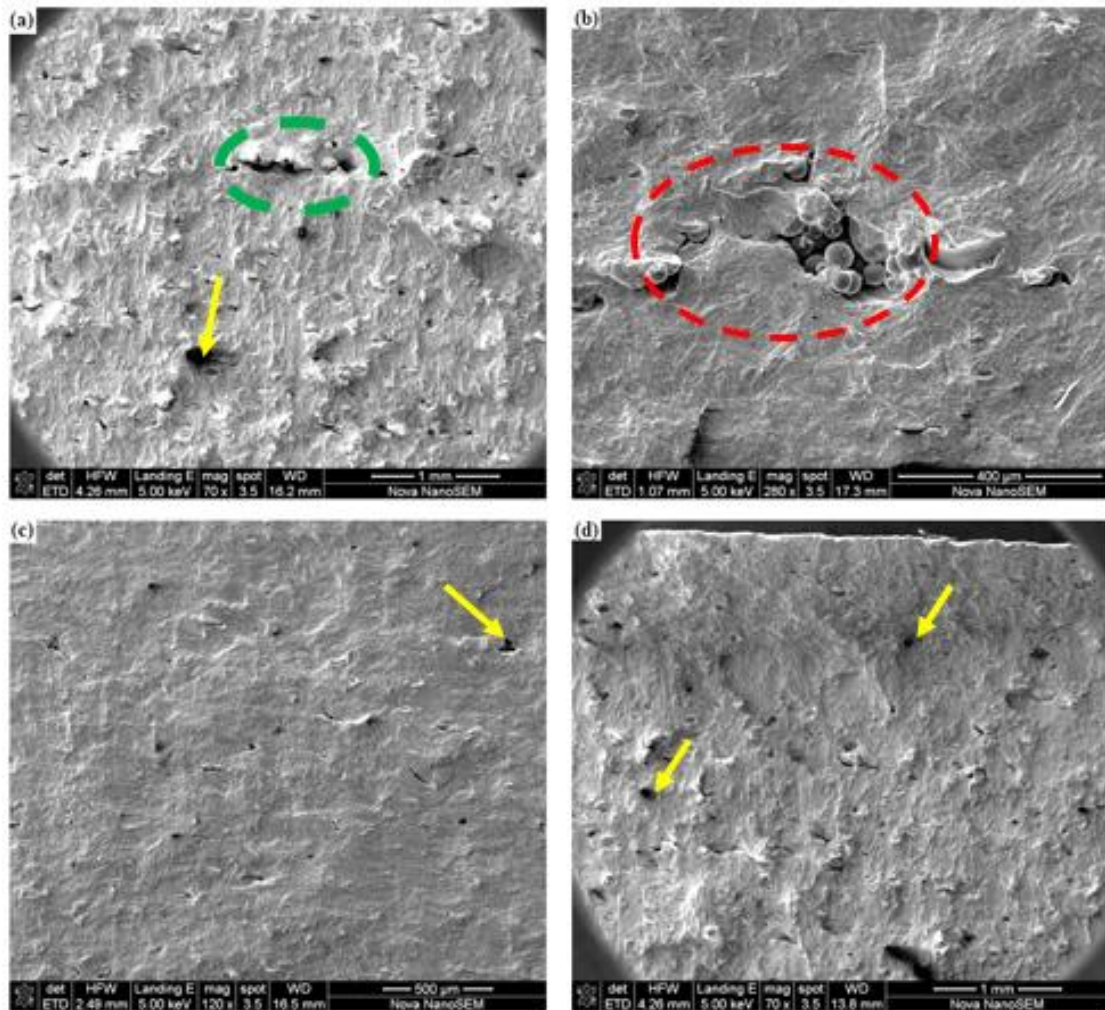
Fractographs taken on failed fracture toughness samples during pre-cracking
